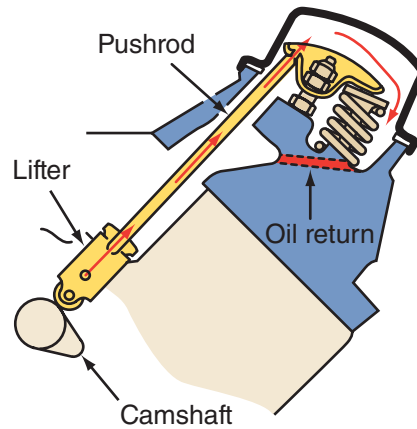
Most pushrods have a hole through the center to allow oil flow from the hydraulic lifter to the rocker arm assembly.
